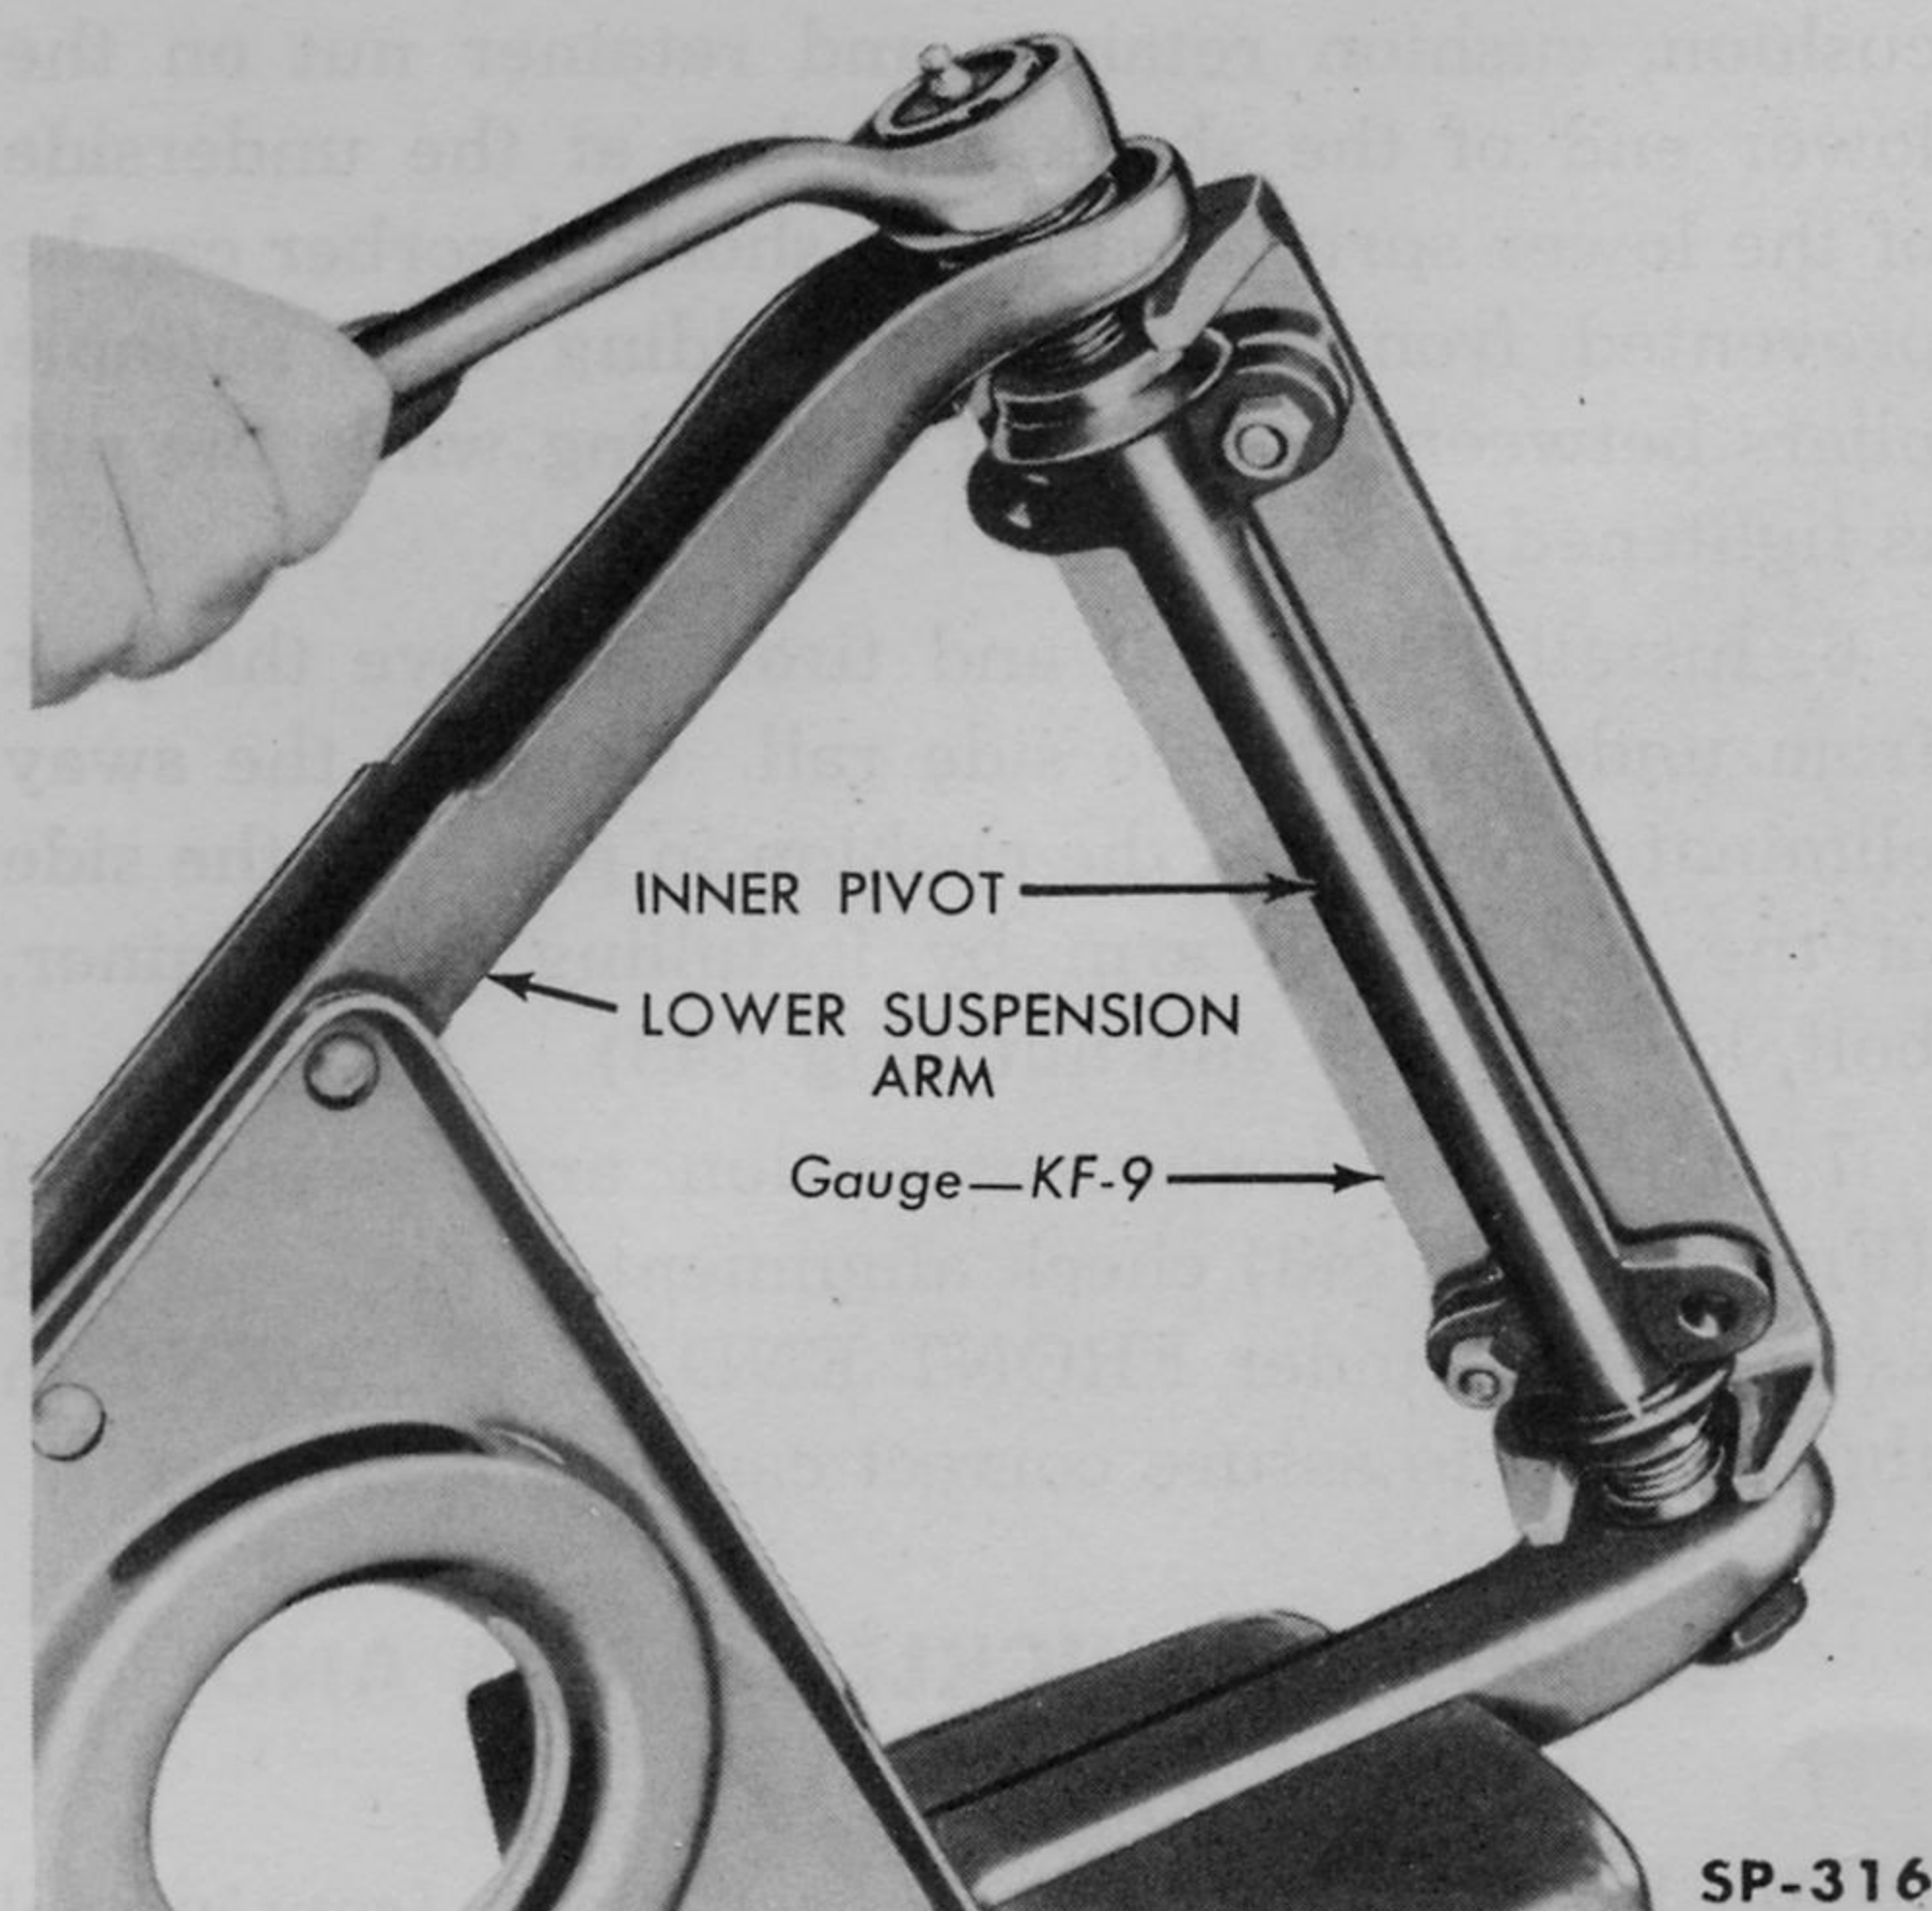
Installing Lower Suspension Arm Inner Pivot
